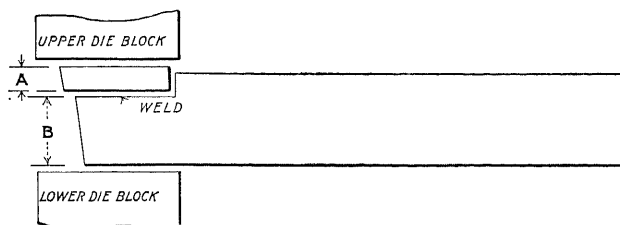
Jaws and Work Arranged for a "Mash" Weld.
